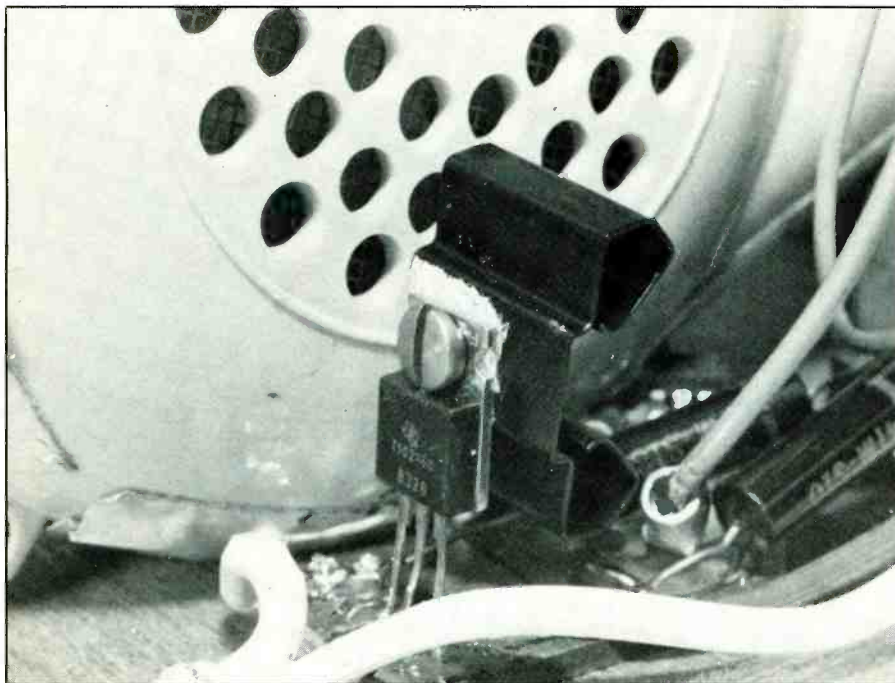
Triac requires bolt-on heat sink. Mount triac/capacitor subassembly so that drawn-in cool air will carry off heat generated by triac.
